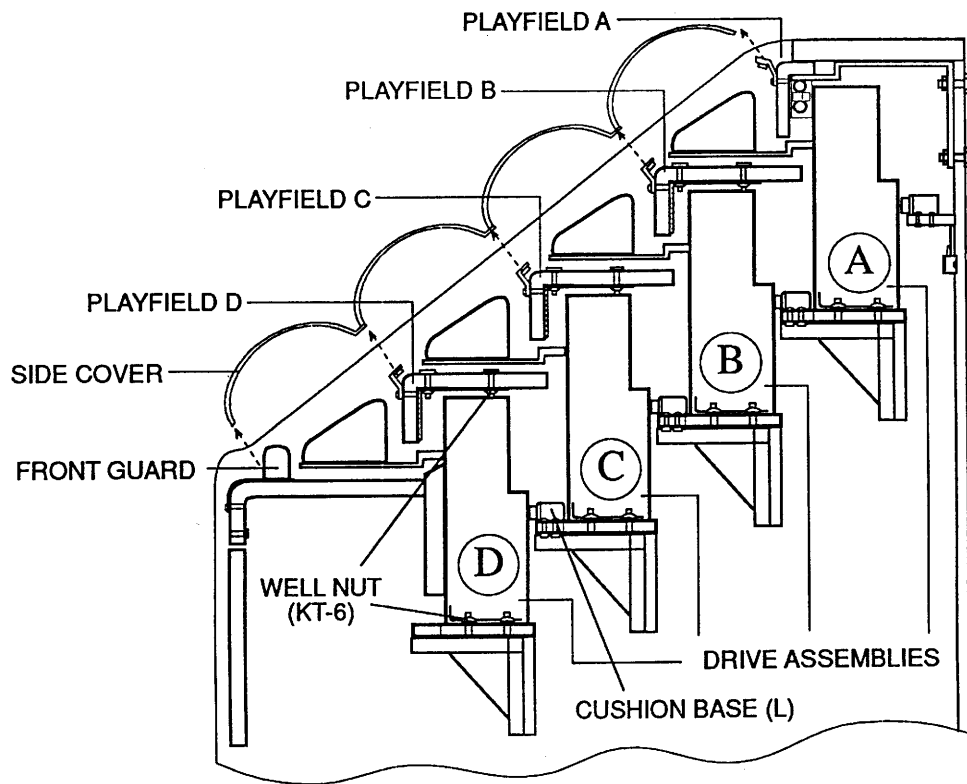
, SIDE CUTAWAY VIEW OF GAME
